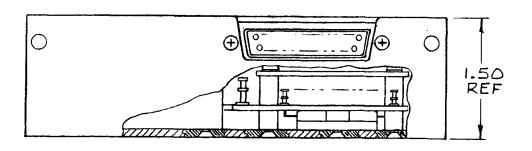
INVERTER MODULE ASSEMBLY
